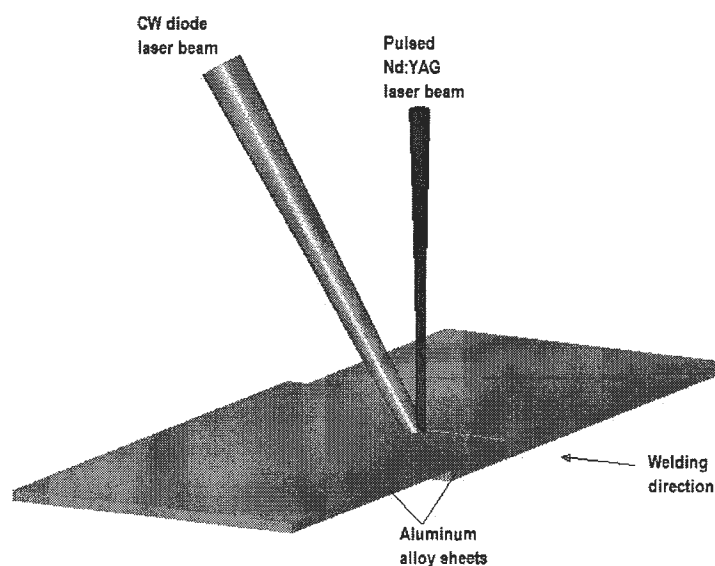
3-dimensional schematic illustration of dual-beam laser micro welding of 5052 aluminum alloy sheets.
